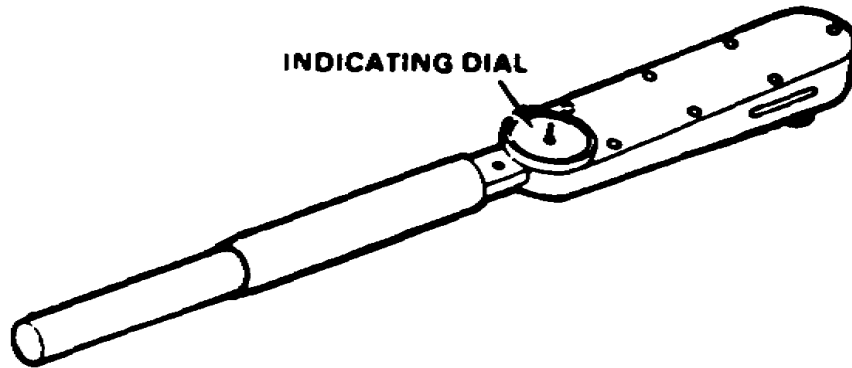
DIAL-INDICATING TORQUE WRENCH
